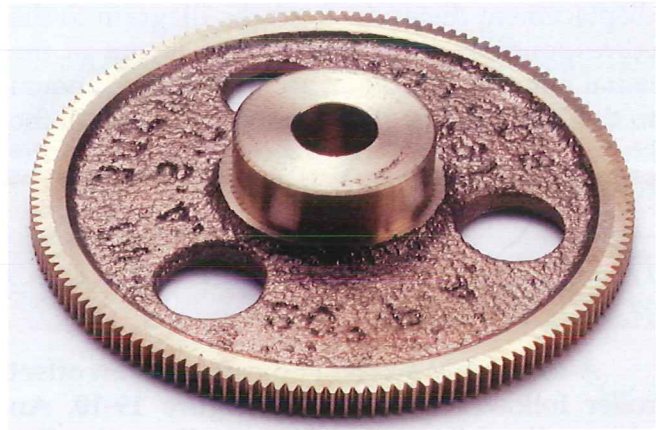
Straight spur gears have teeth cut parallel to the gear axis and are used to transmit motion between parallel shafts. (Boston Gear Co.)
